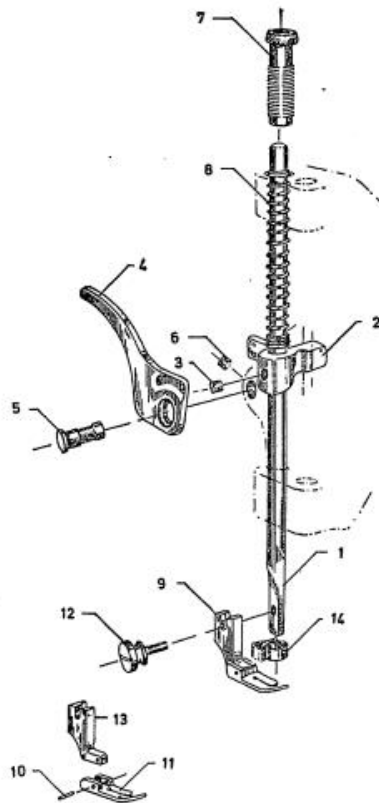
PRESSURE BAR AND LIFTER ASSEMBLY
